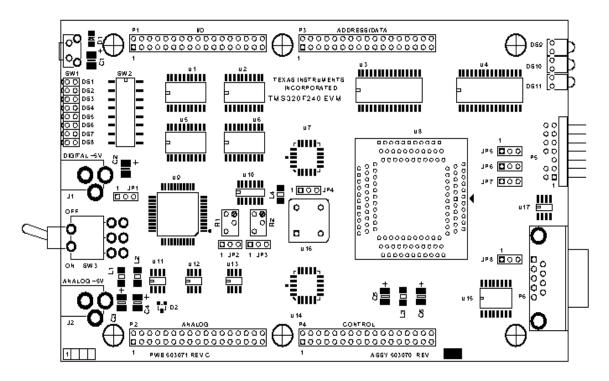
Top view of Motor Interface Board for TMS320F240-EVM
